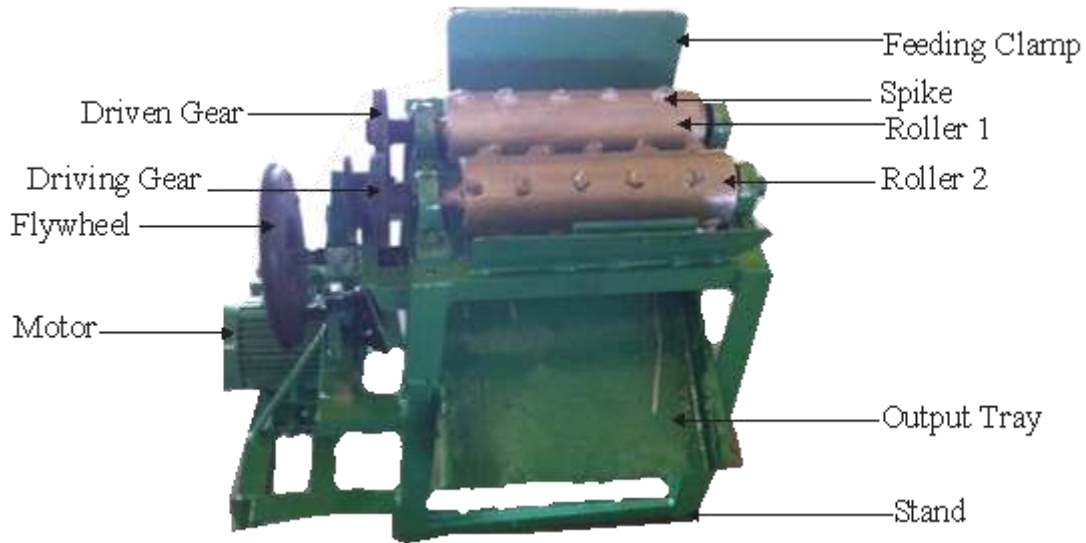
Showing the Mechanism of the Coconut Dehusking Machine
